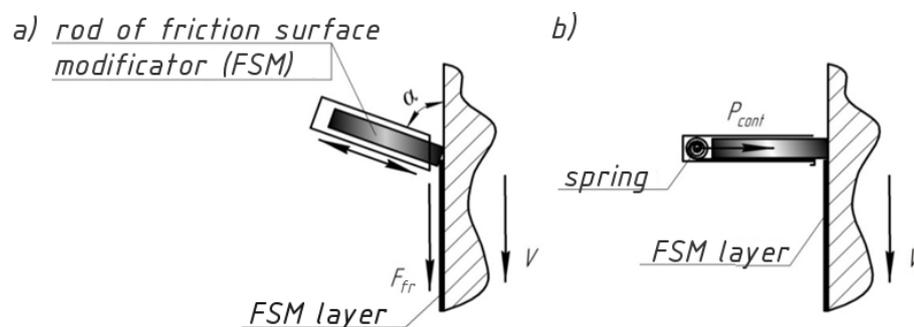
The scheme of contact-rotaprint modification of friction surfaces: a) drive gear on the base of servoeffect; b) conventional drive gear
